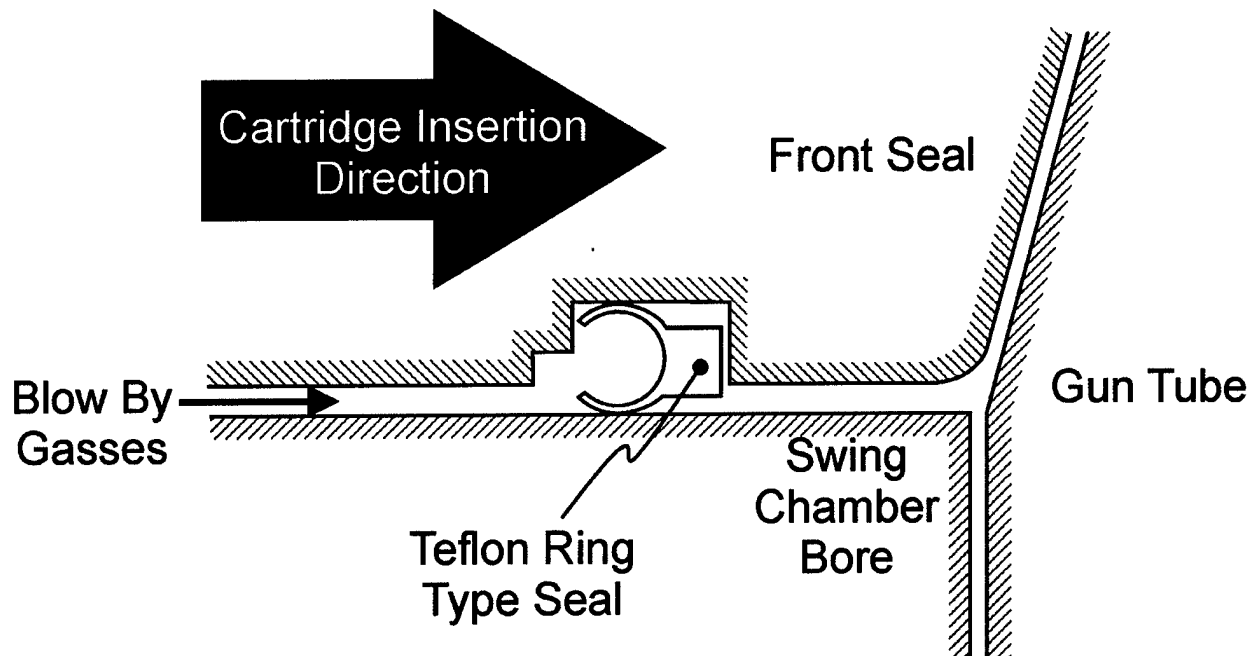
Cross-Sectional Dimension of Teflon Ring Seal
